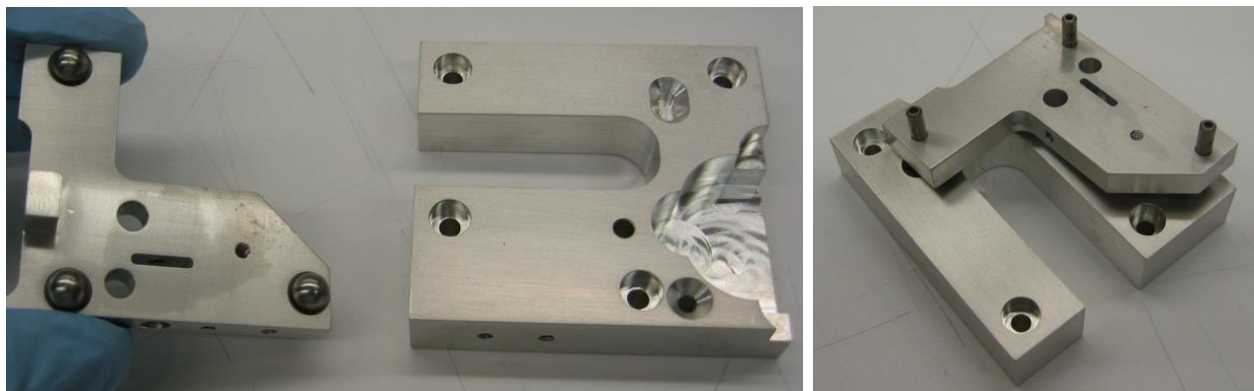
The two halves of the kinematic mount for the detector package showing the three ball sockets, the mating surfaces on the fixed-plate (left), and the assembled mount (right) where one can see there is access to the fixed plate counter-bore holes for shimming.
